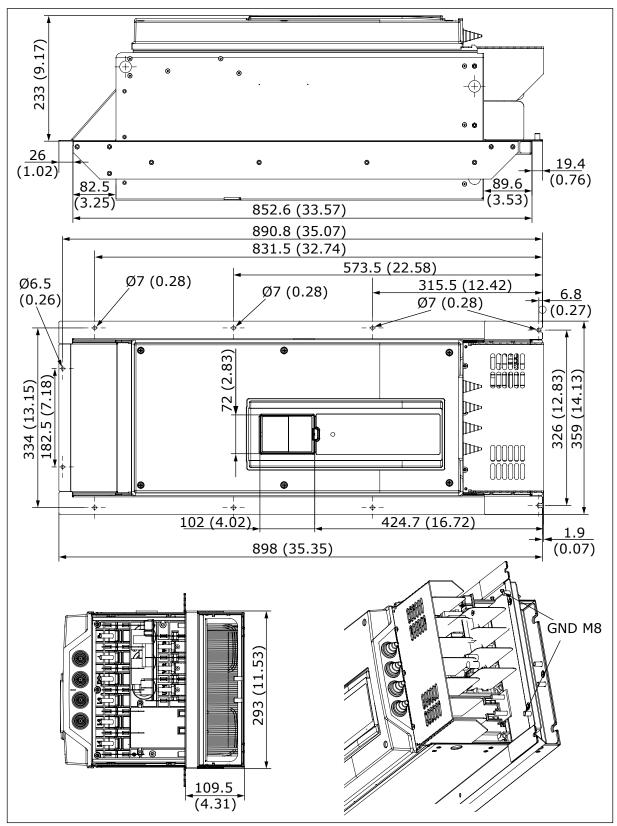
The dimensions of the AC drive, flange mounting, MR8 [mm (in)]
